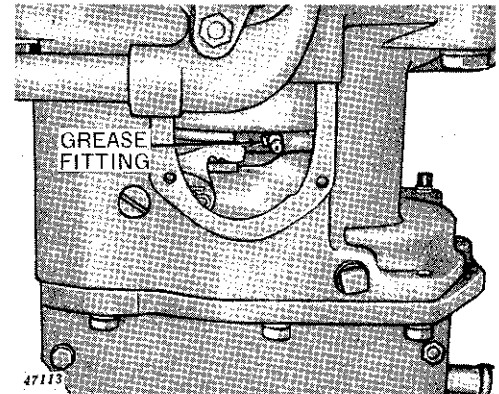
Grease Fitting on Cranking Engine Clutch Release Bearing Collar
